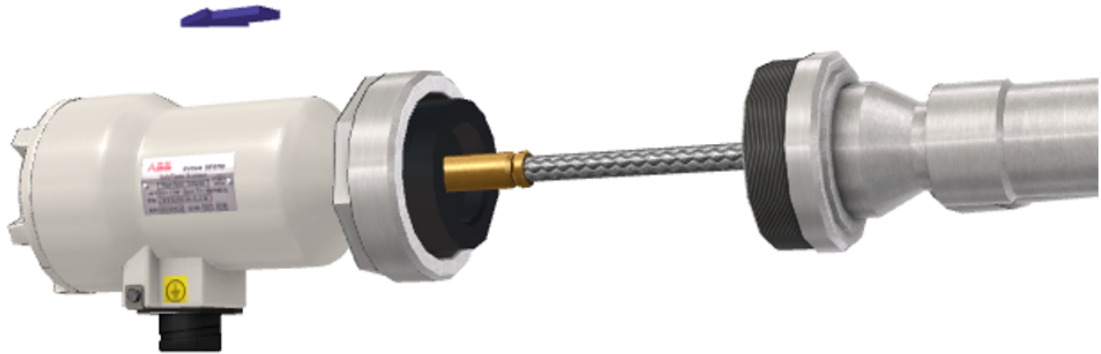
FOC Assembly - Pulling Fiber Optic Bundle
